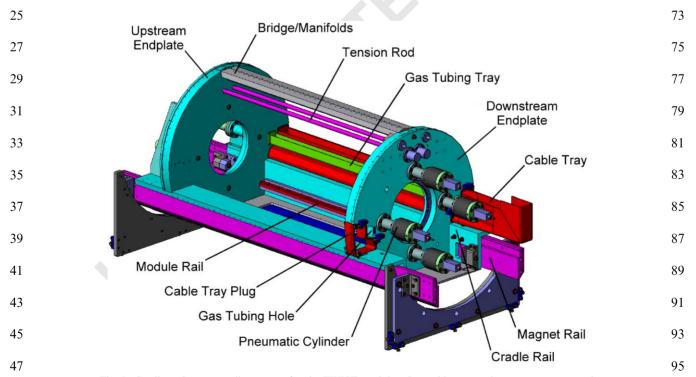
Cradle and magnet rail structure for the TWIST modules. One cable tray and gas tray are removed.
